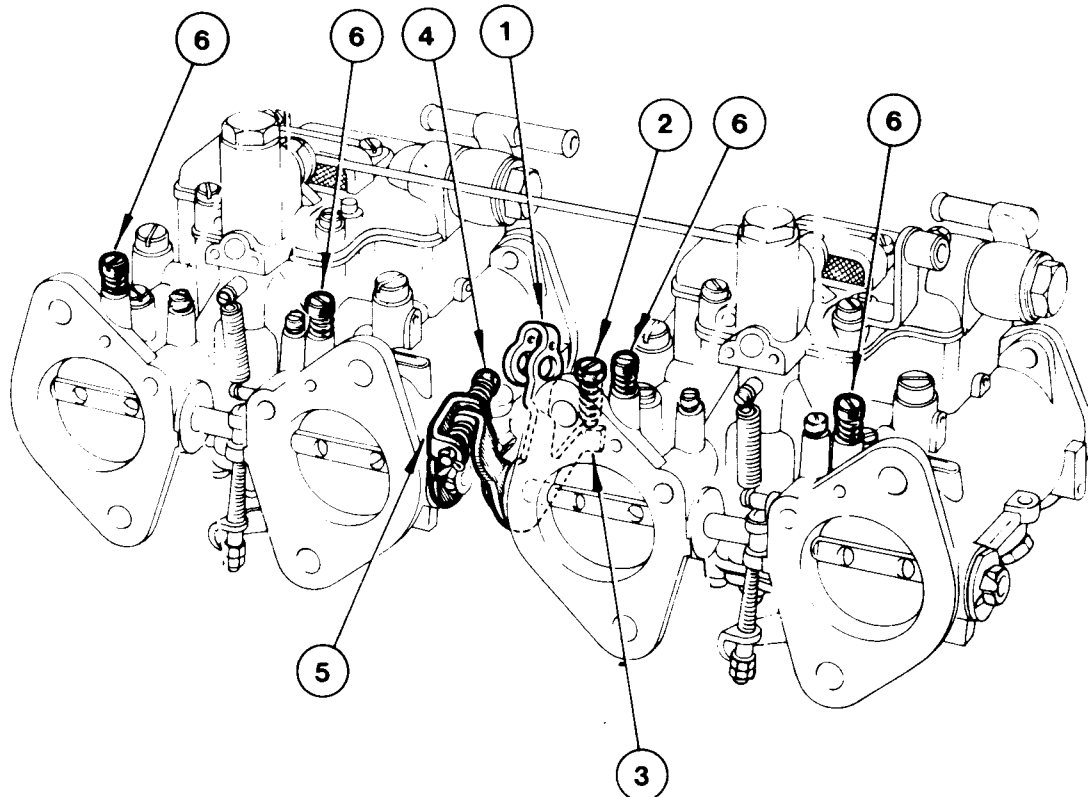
CARBURETTER SYNCHRONISING SCREWS.
